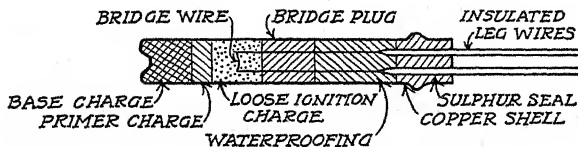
Principal components of a Du Pont Electric Blasting Cap
